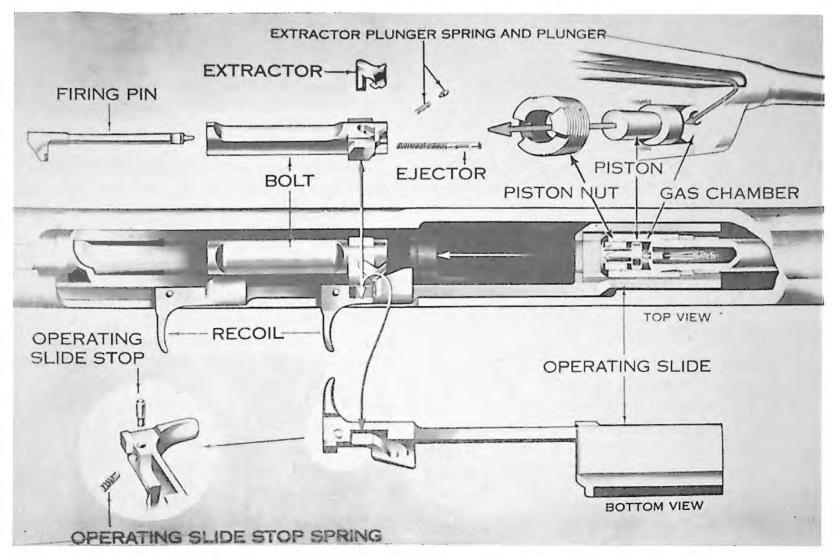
Bolt and operating slide assemblies, U.S. carbine, caliber .30, M1.
